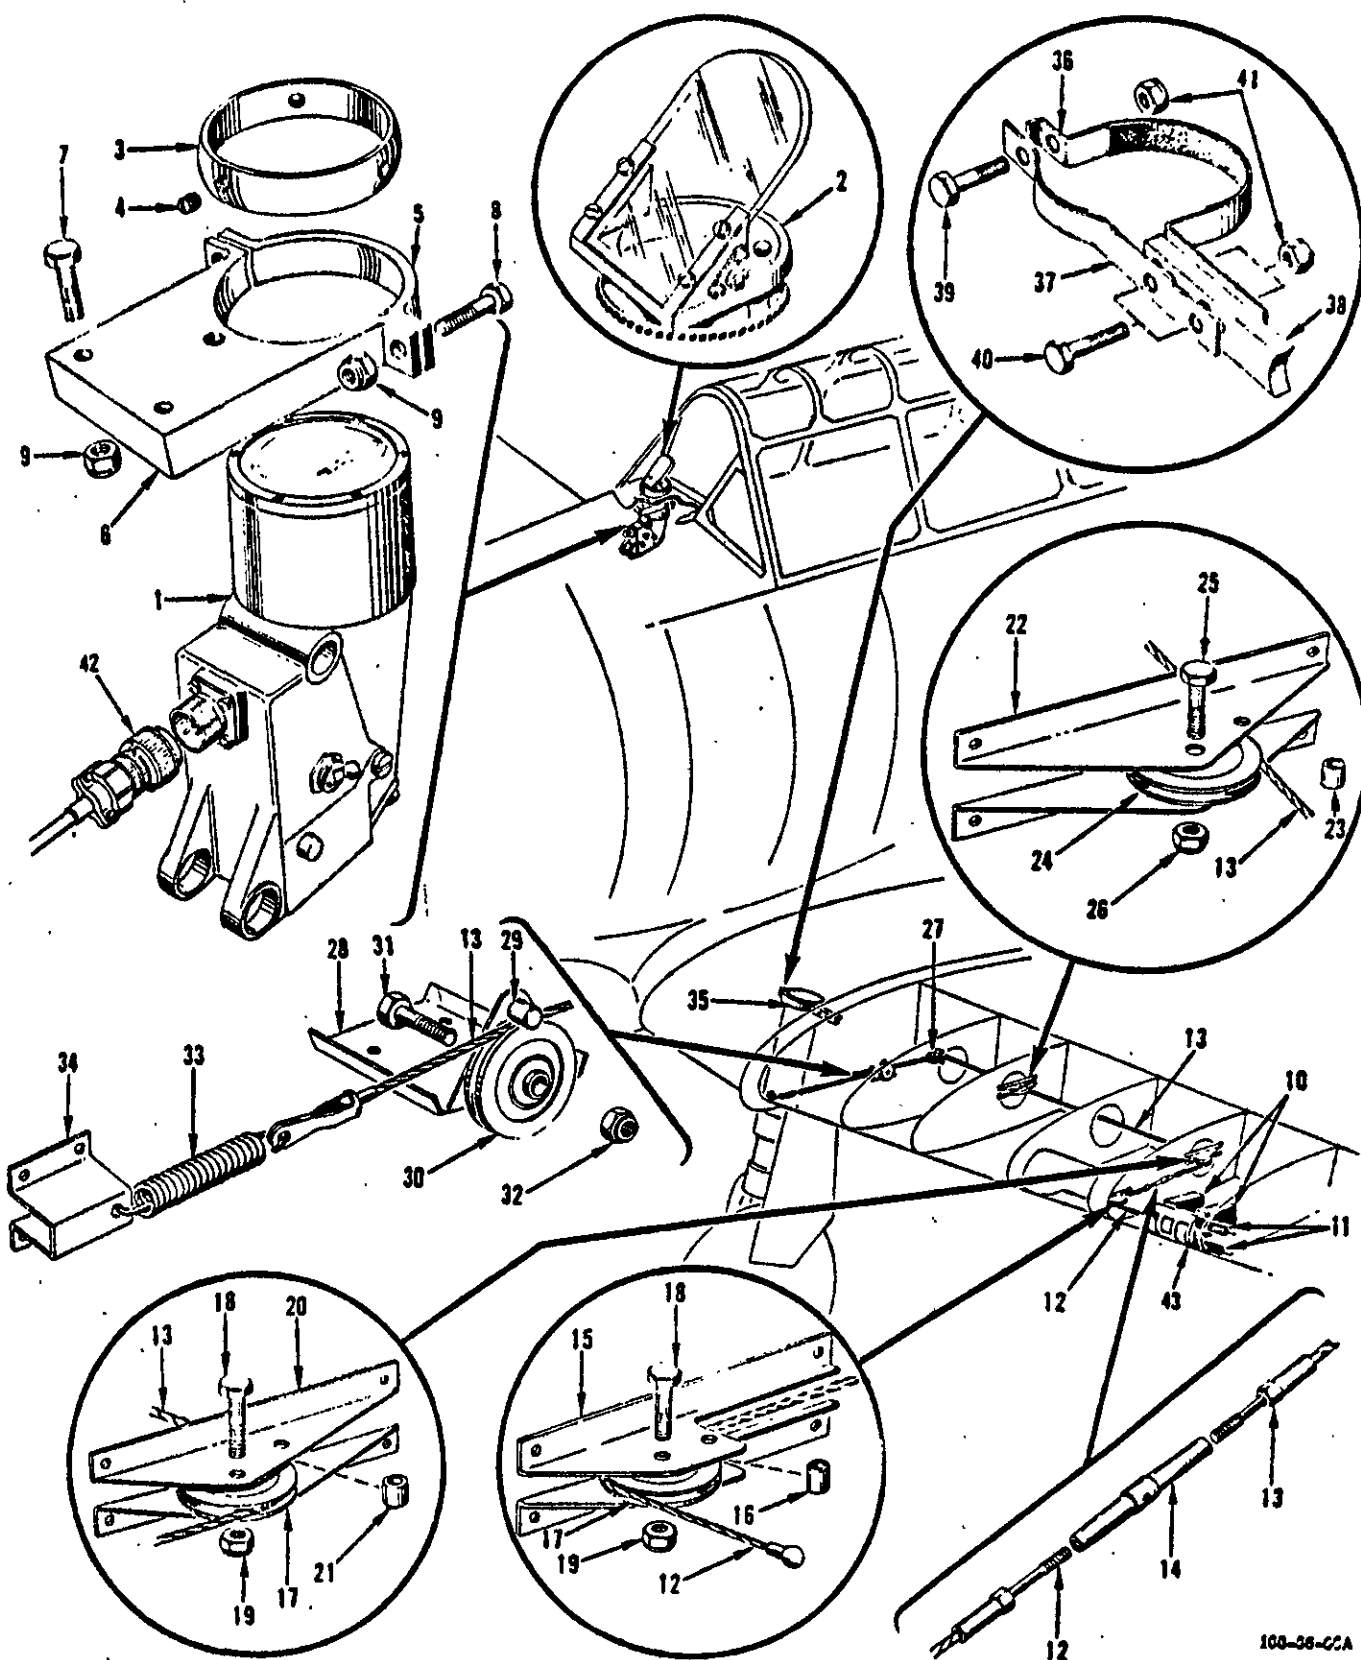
D - 30 CALIBER GUN PACKAGE ASSEMBLY
